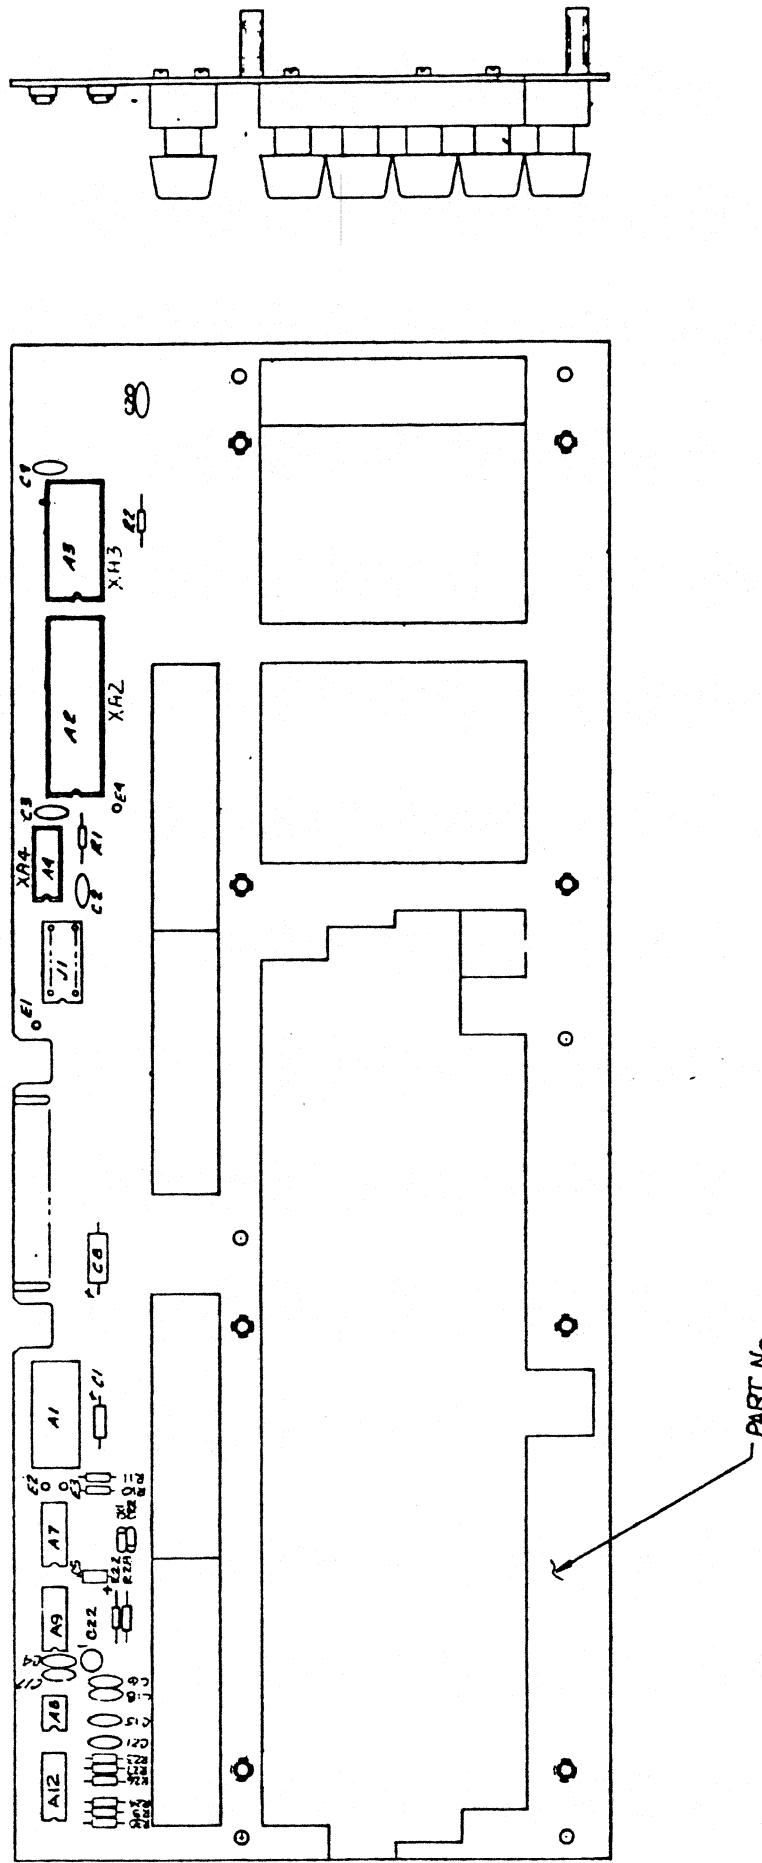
B100 Series Keyboard Assembly, 112-1775
